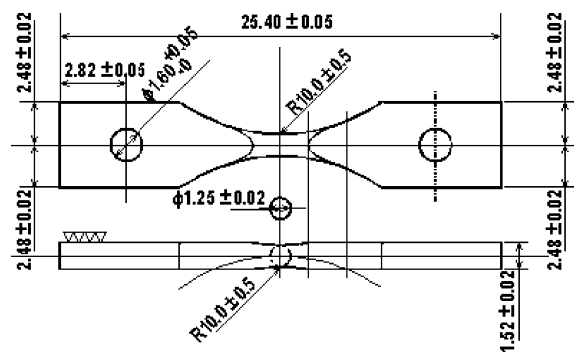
Dimension of miniaturized hourglass shaped fatigue specimen.
